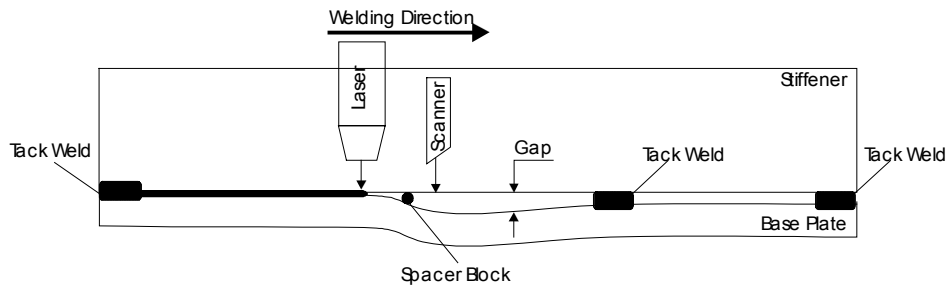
Sketch of distortions in the weld groove caused by heat contractions.
